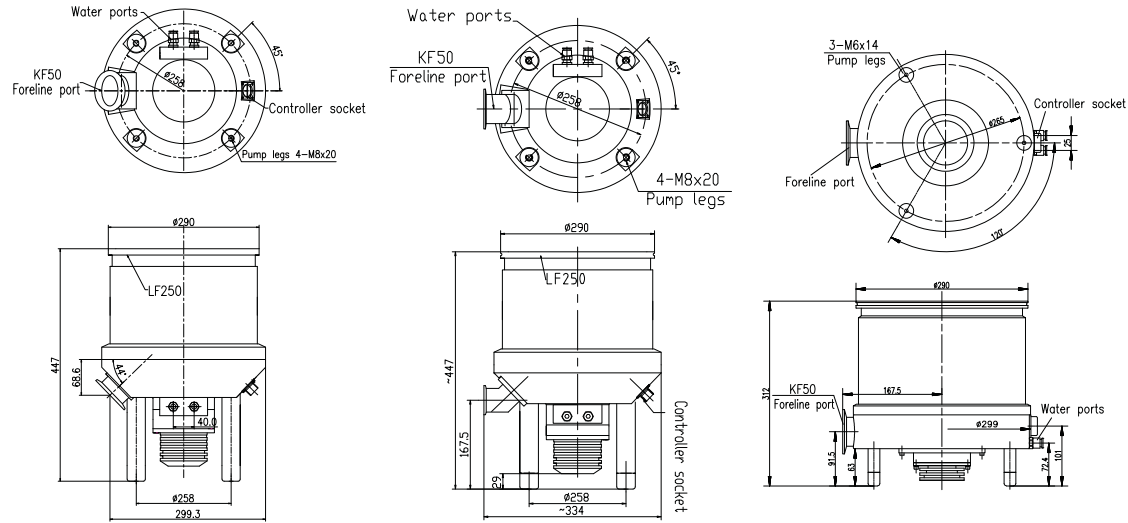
FF-250/1600E dimensions Figure 2-16 FF-250/1600BE dimensions Figure 2-17 FF-250/2000E dimensions
